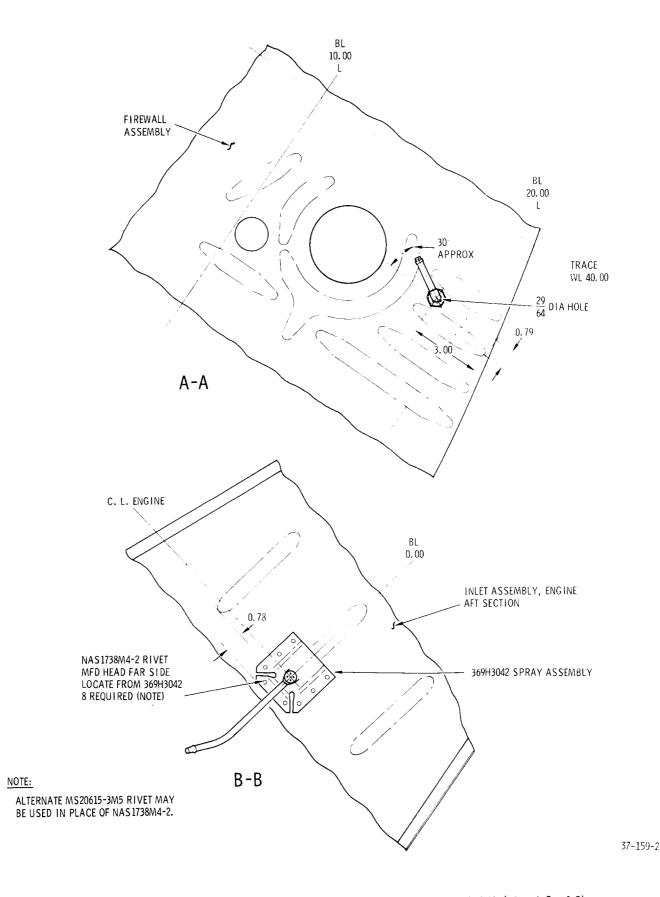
Installation of engine compressor water wash kit (sheet 2 of 3)
